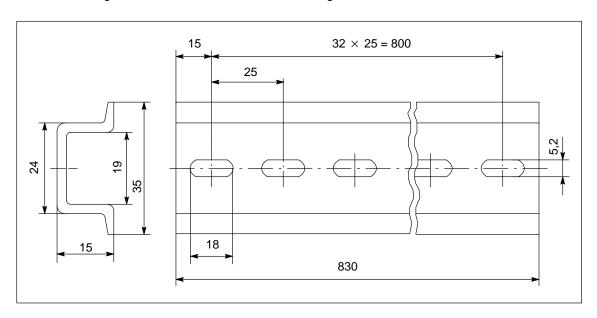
Dimension Drawing of the 830 mm Standard Rail
